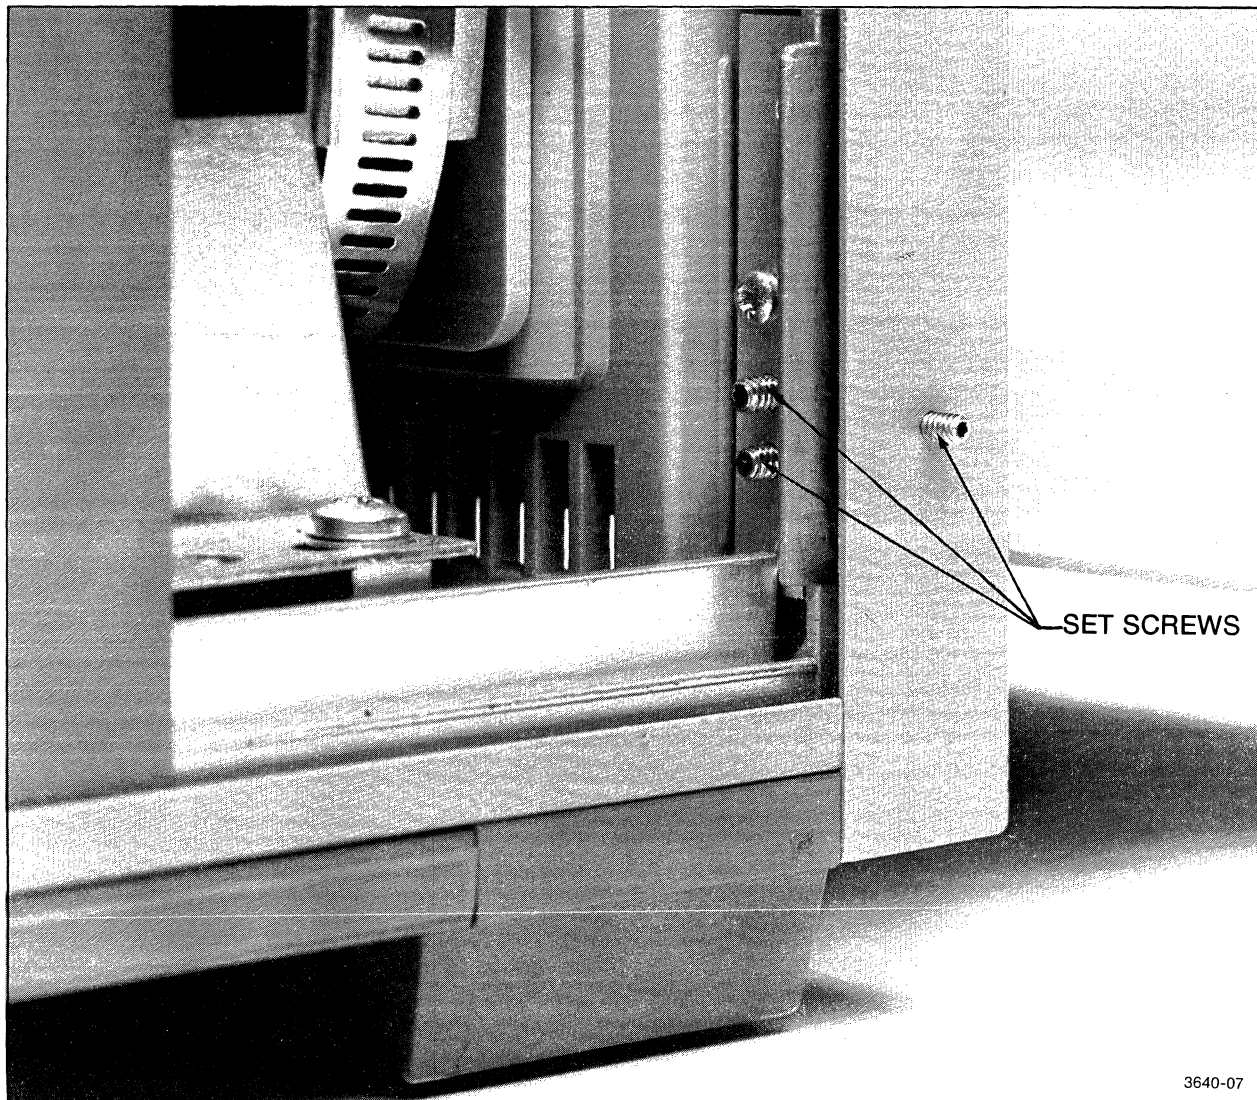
Socket-head set screws secure the rear keyboard frame to an angled metal bar on the front casting.
